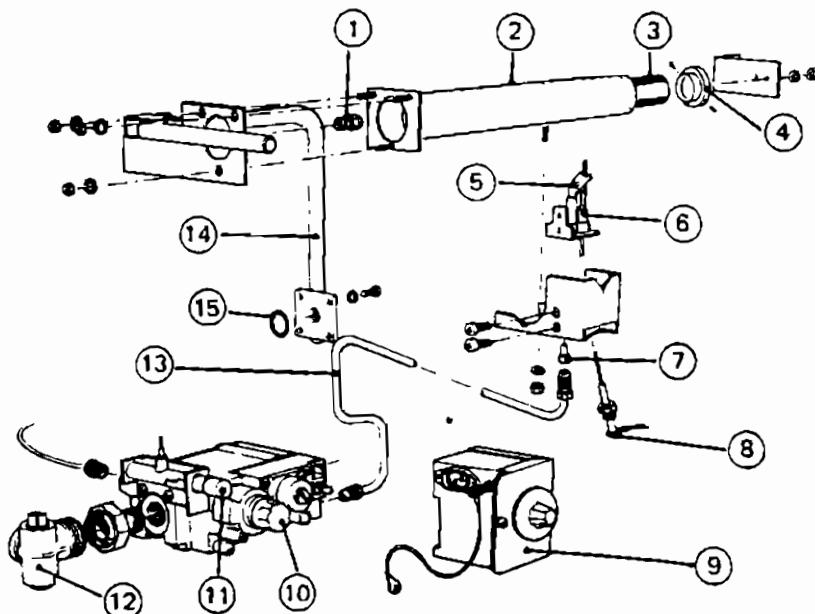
EXPLODED VIEW OF BOILER CONTROL BOX
